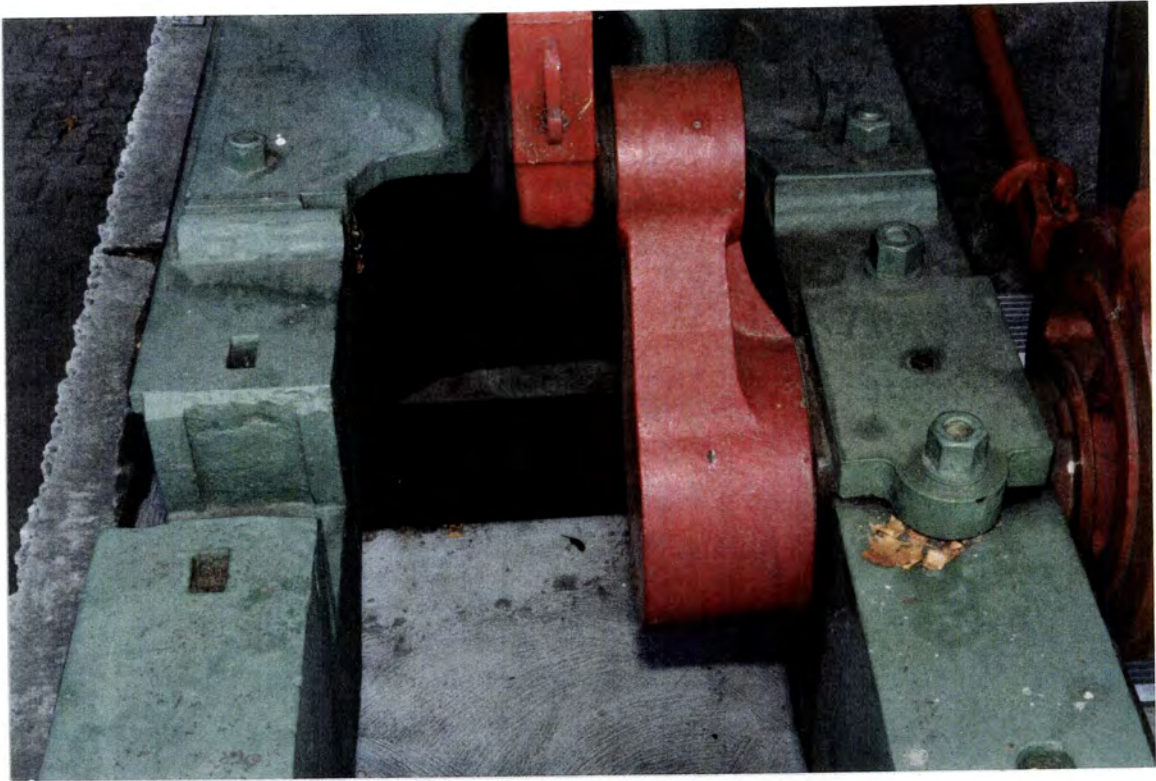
Showing provision in the Bedplate casting for the drive to be taken out from either side of the Engine.
